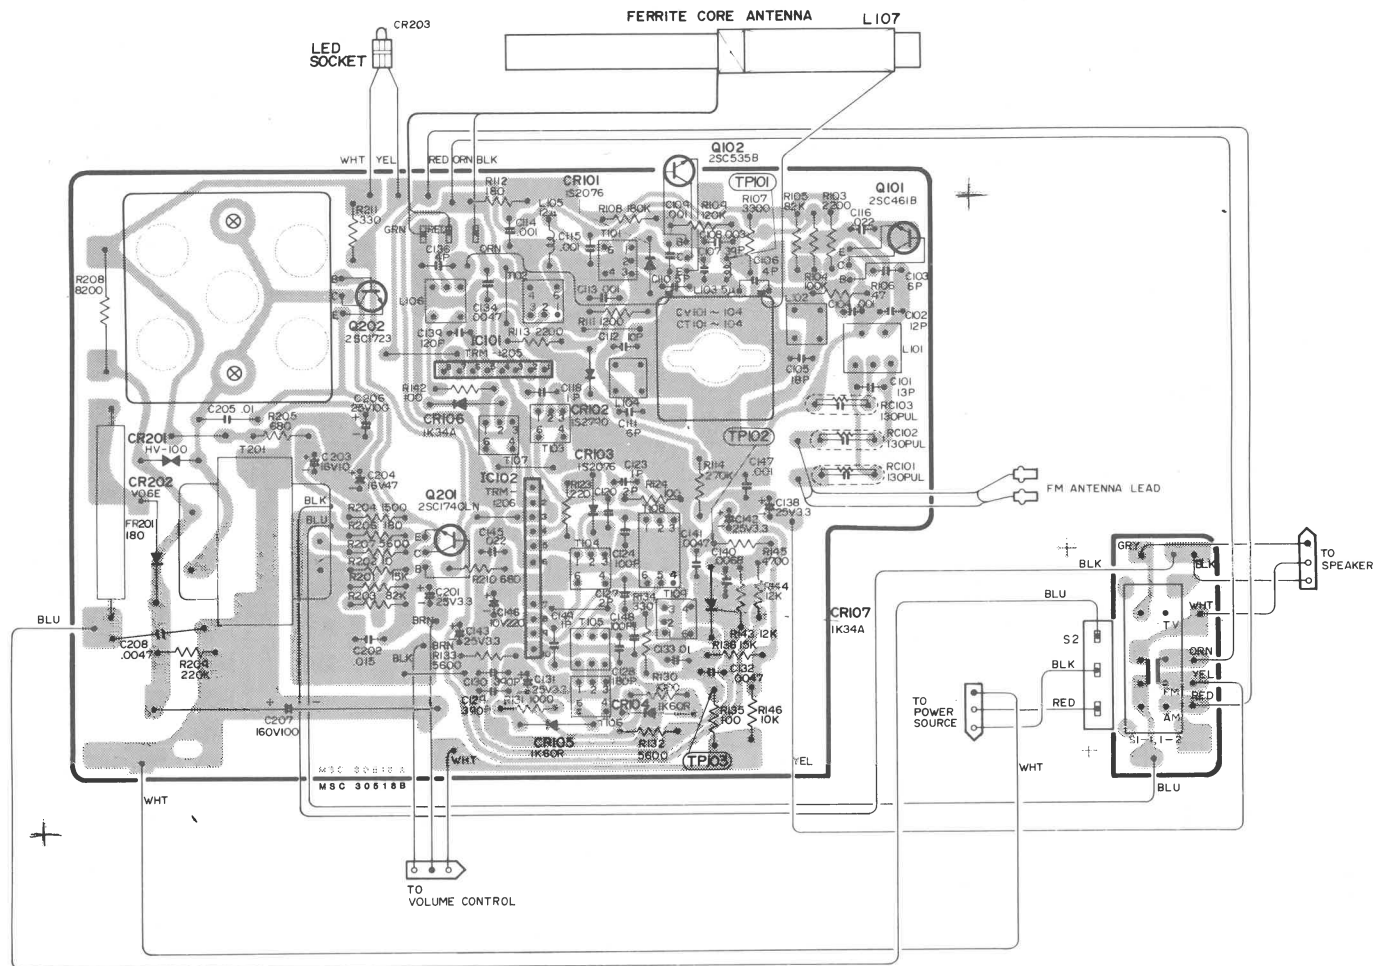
RC 3042 Circuit Board Assembly Layout and Interconnect Wiring
